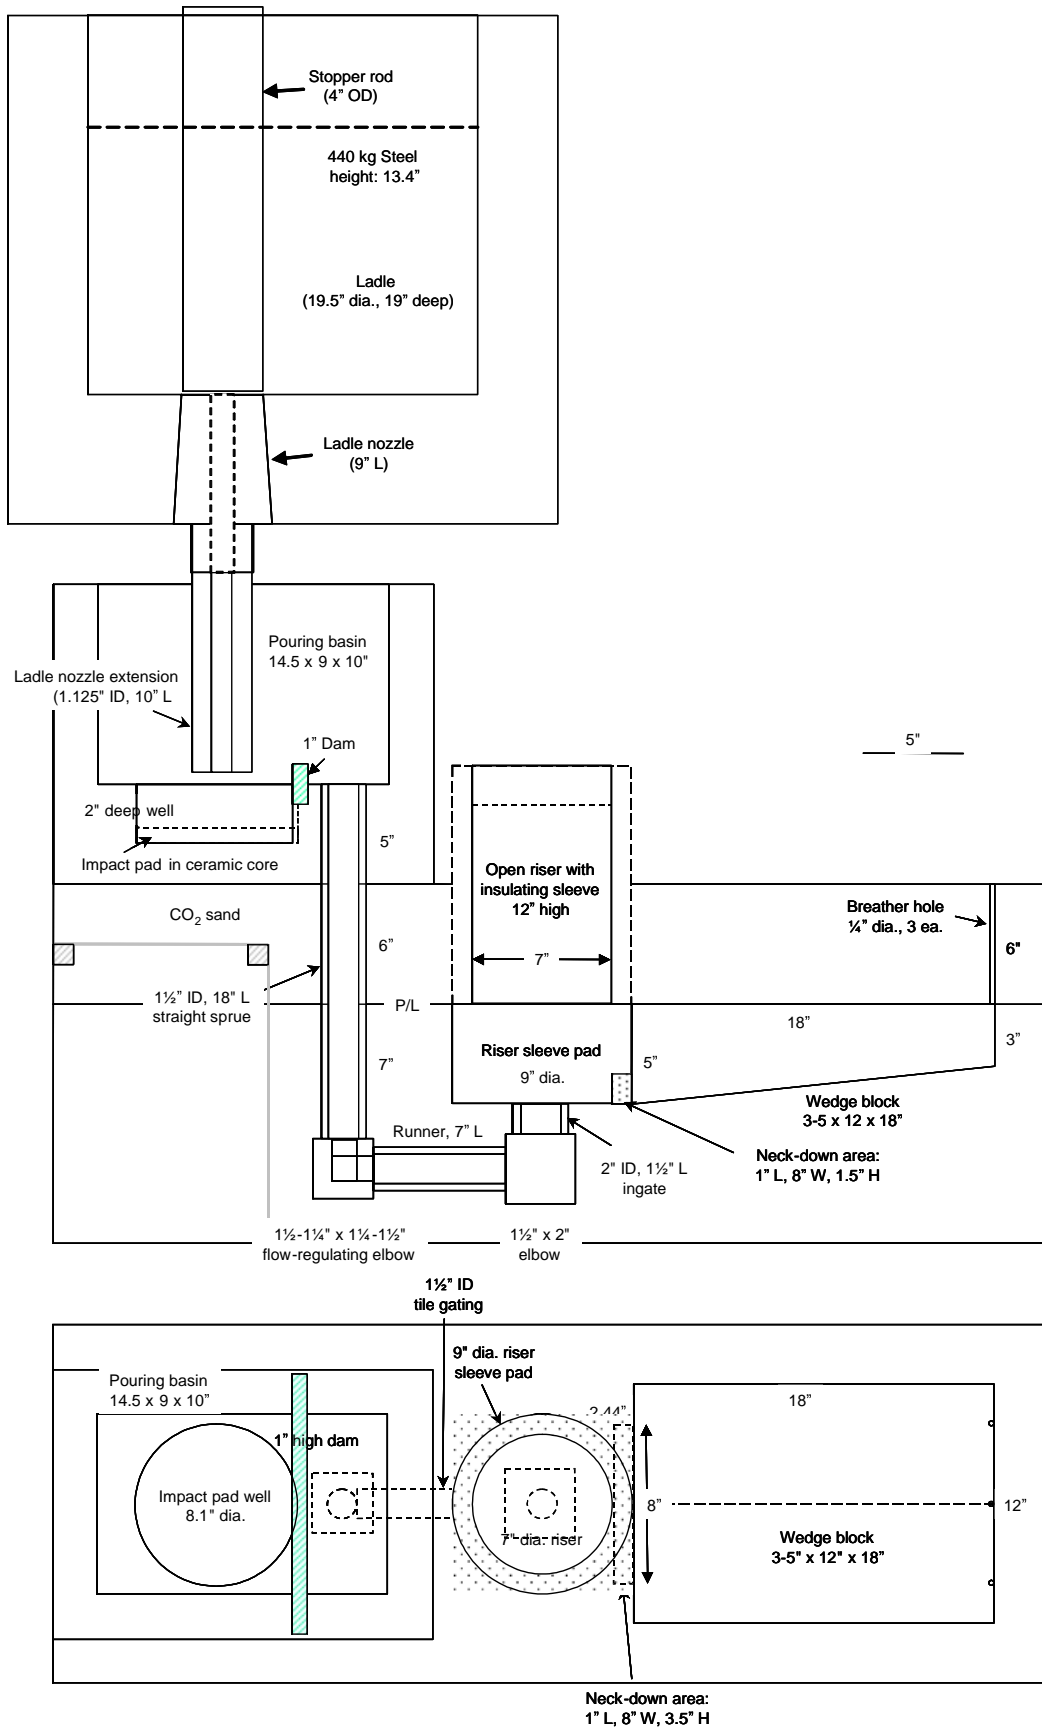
Methoding of the wedge-block casting with a submerged ladle nozzle extension in pouring basin, side and plan views. Poured weight (with pouring basin): 125 kg, casting weight: 99 kg.
